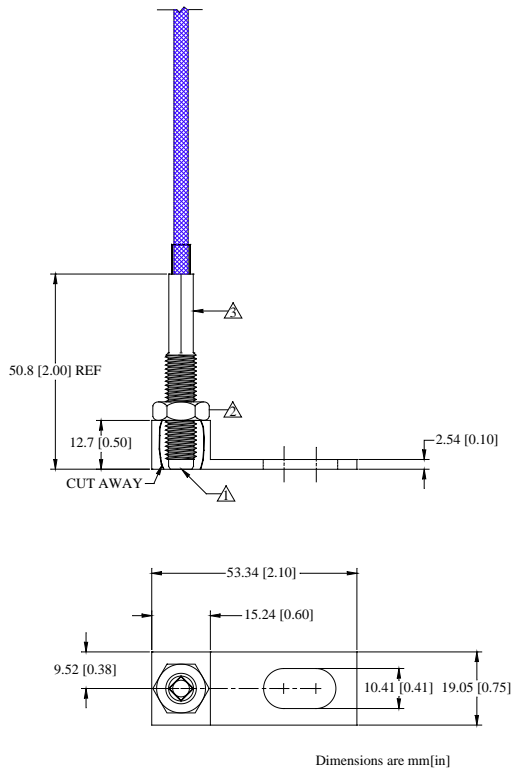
Thermocouple and Optional Right Angle Mounting Adaptor
